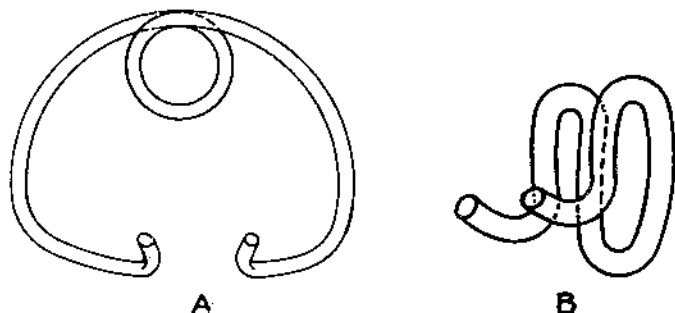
Clips: A, Old type; B, new type. Both enlarged
